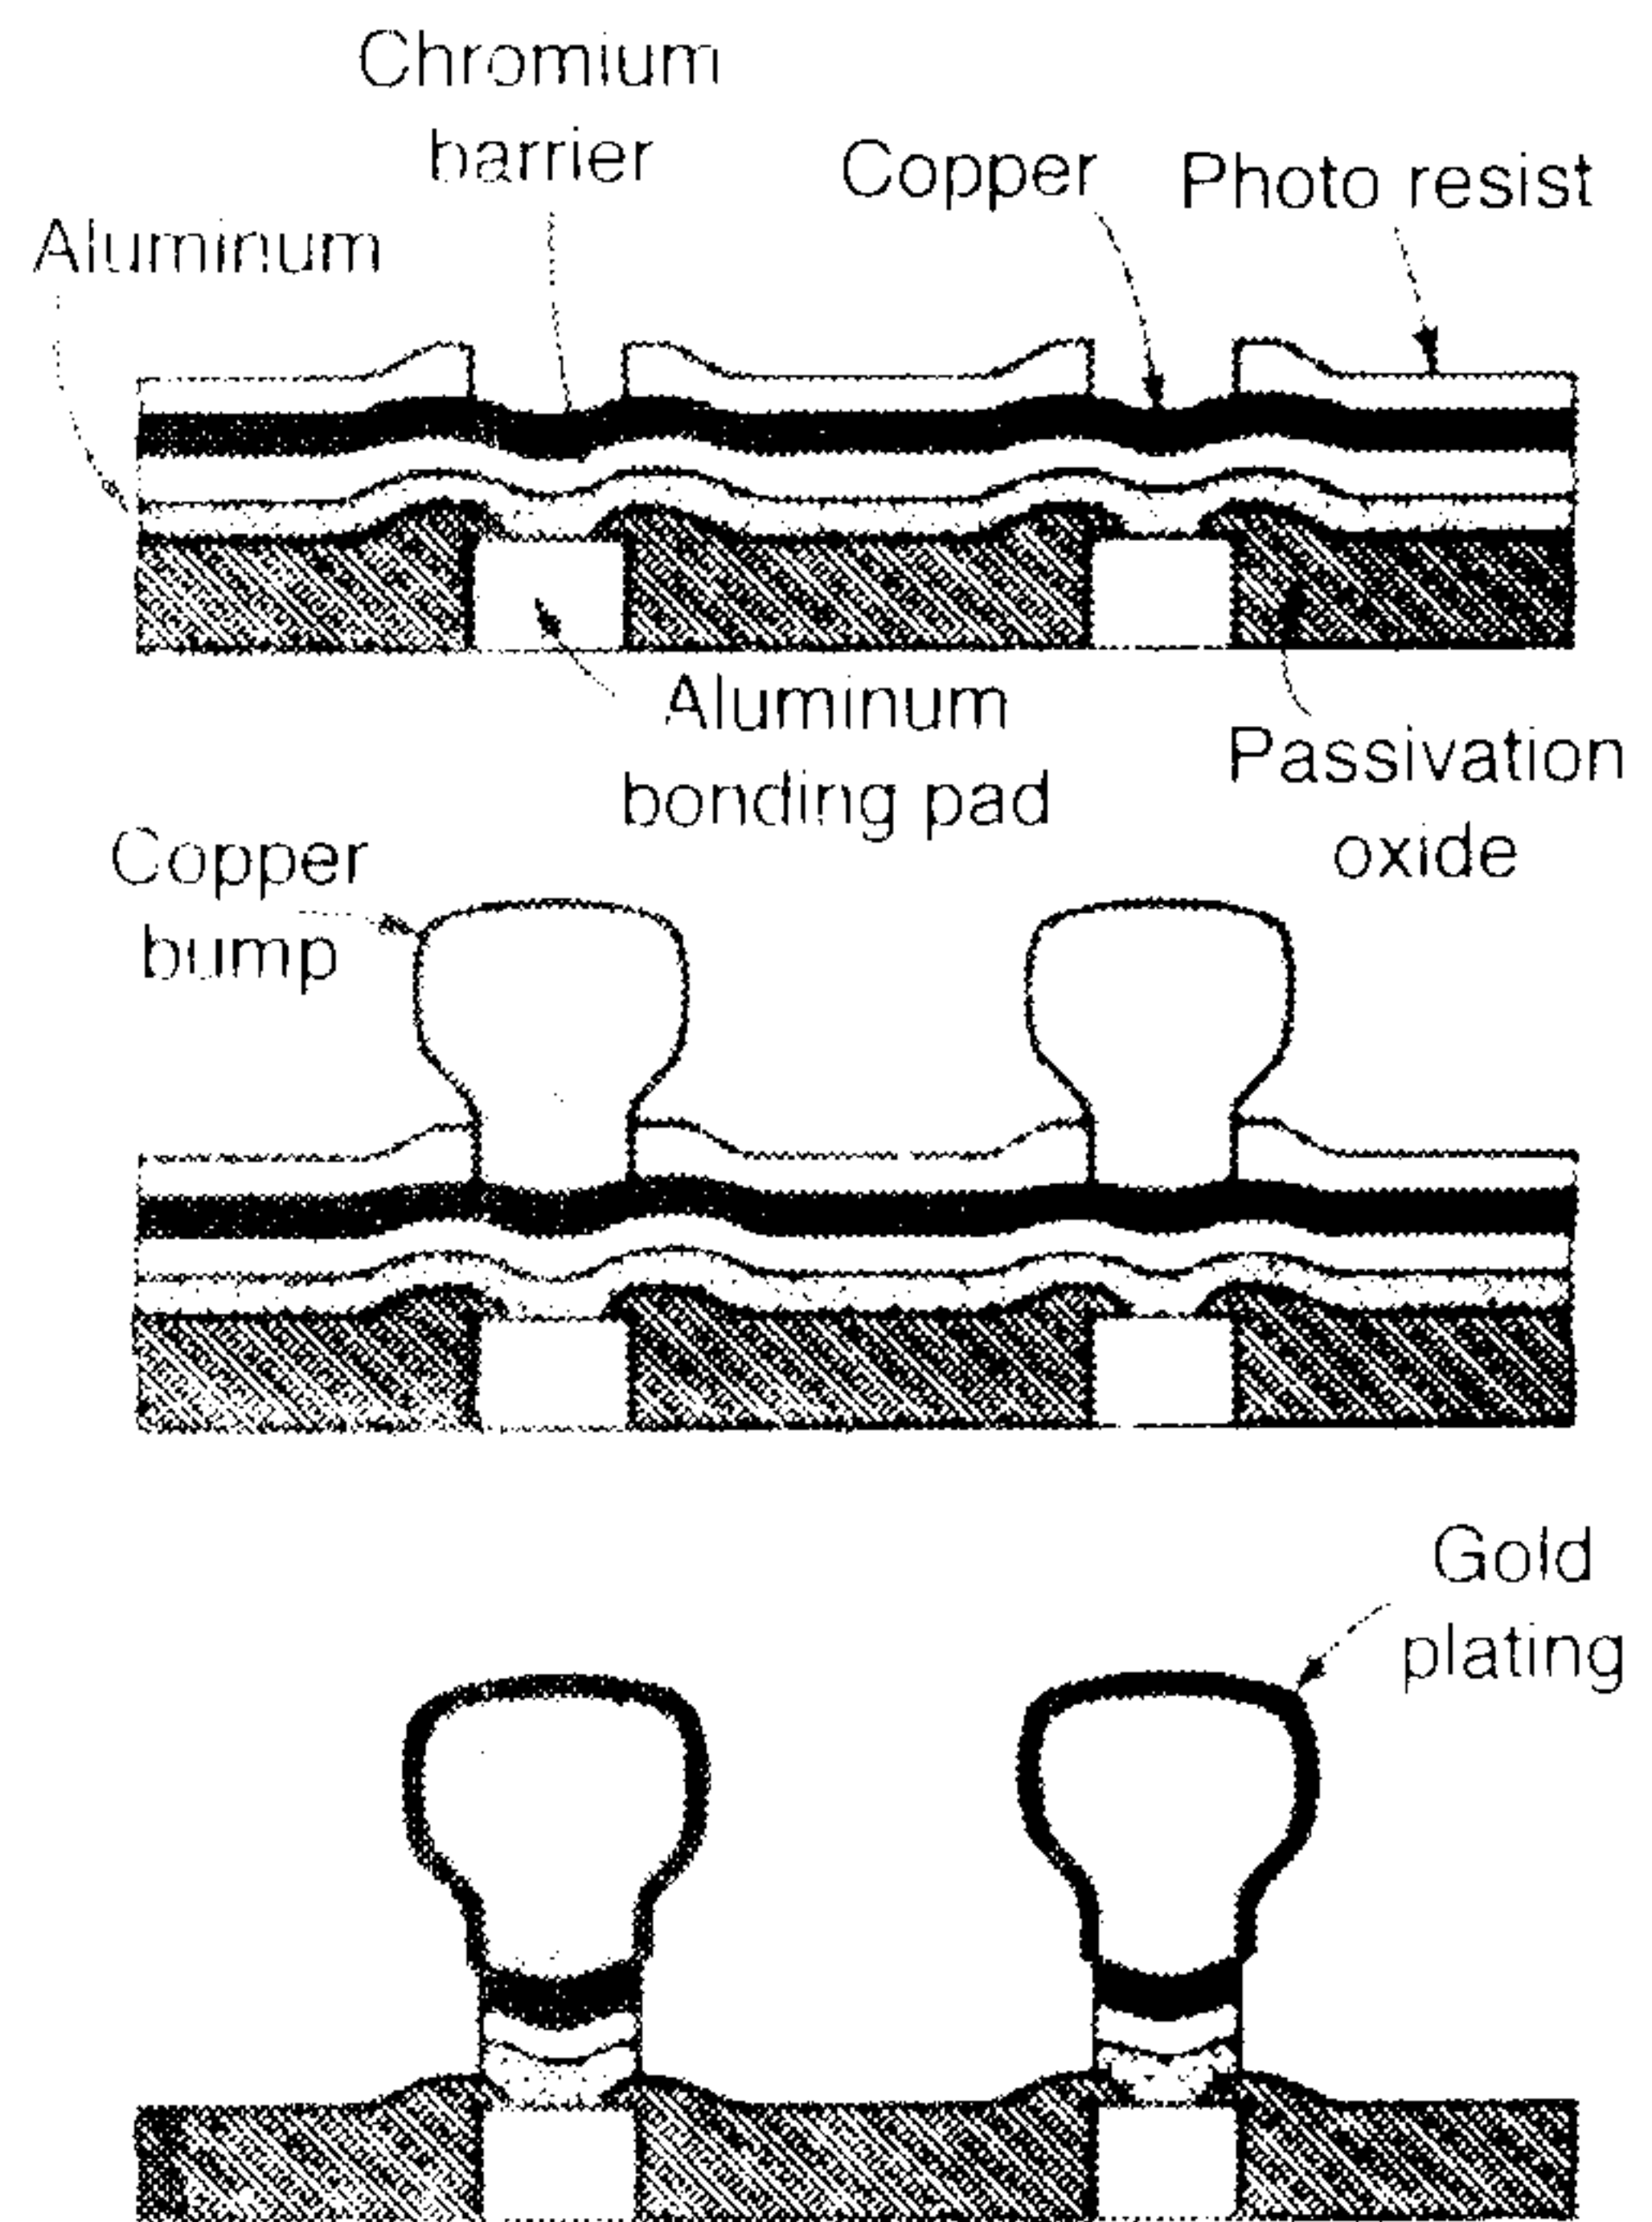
Processing steps followed in placing gold plated solder bumps on a chip in preparation for TAB bonding.
